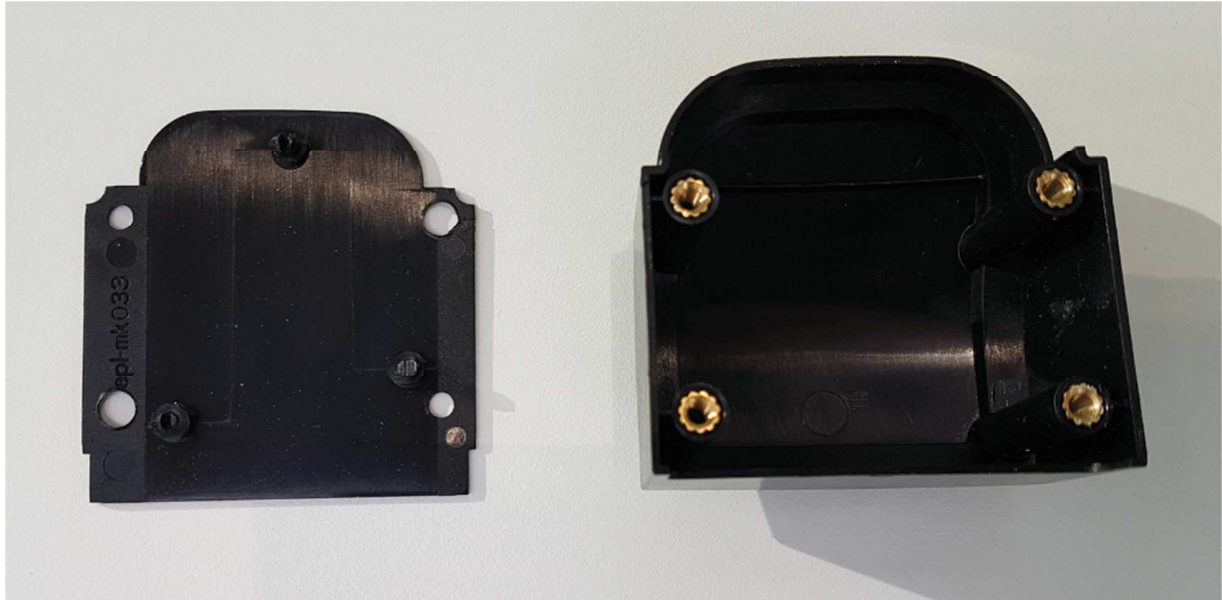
Rear view of Radio Module cover removed from main housing and PCB
